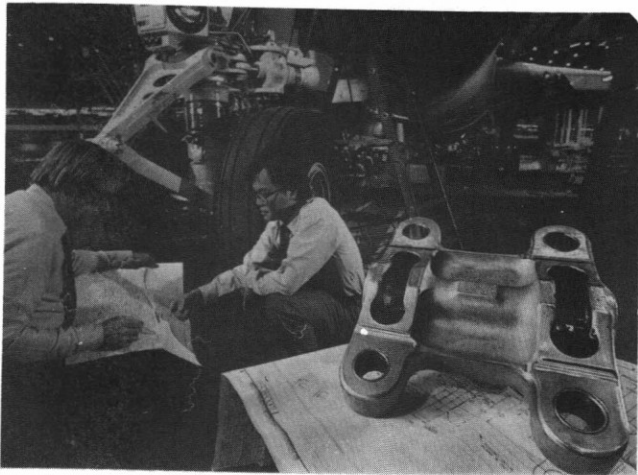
2090 forging which serves as tow fitting on a Boeing 747 landing gear (courtesy: Aluminum Company of America).
